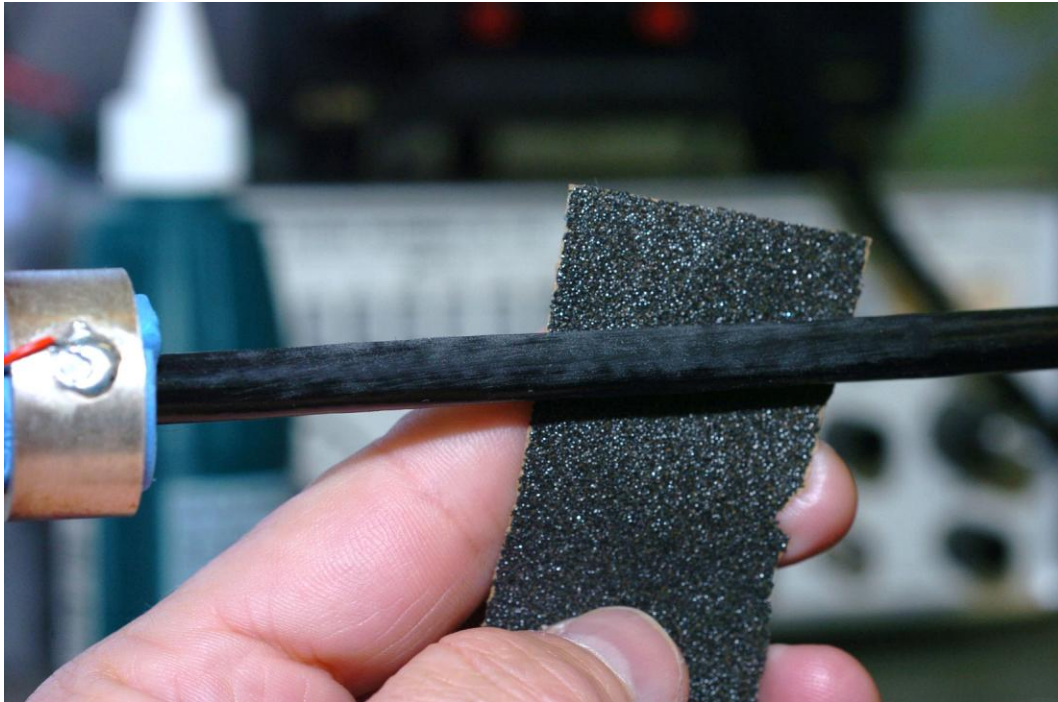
Buff the cable with sand paper and clean thoroughly with acetone to ensure a good bond between the polyurethane and the cable.
